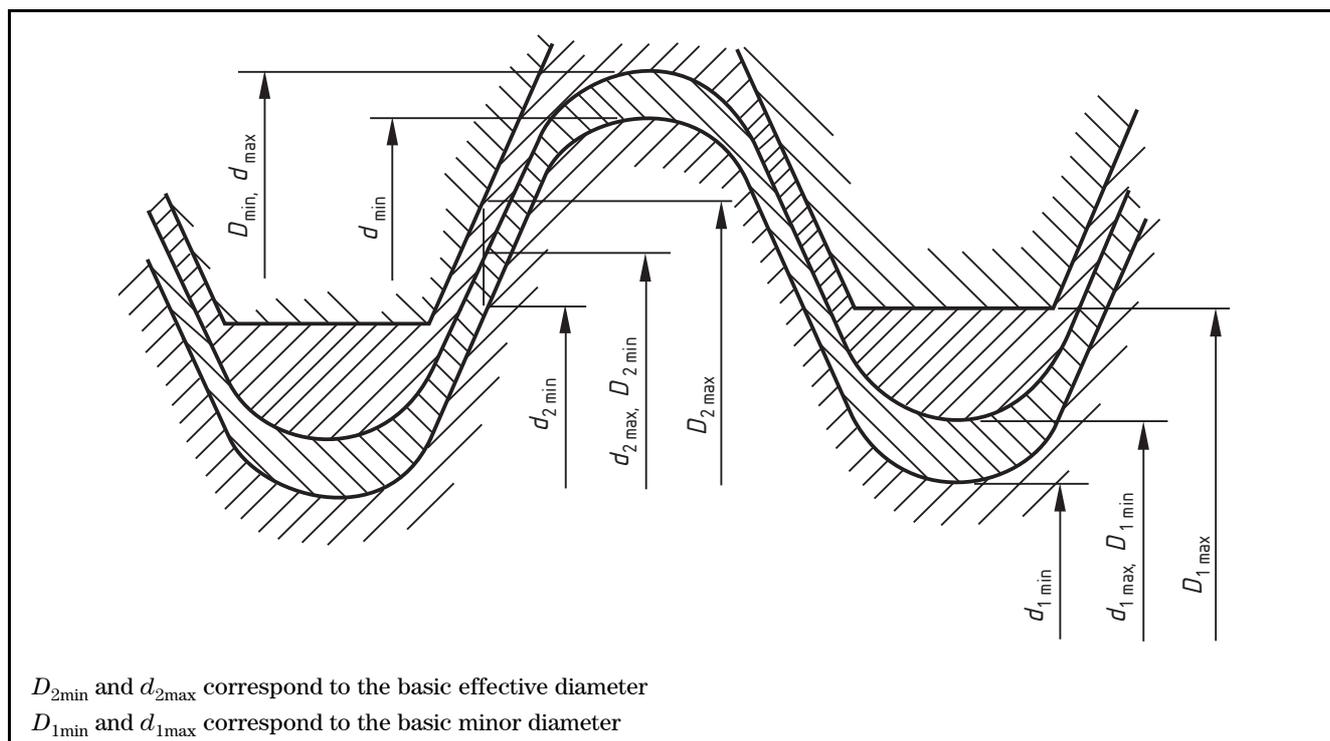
Tolerance zones for a normal class external thread and an internal thread
